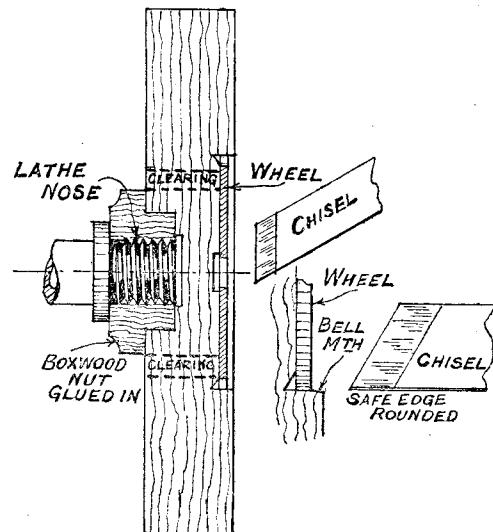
Section of wood faceplate, showing nut recess and method of chucking fine tooth wheels
